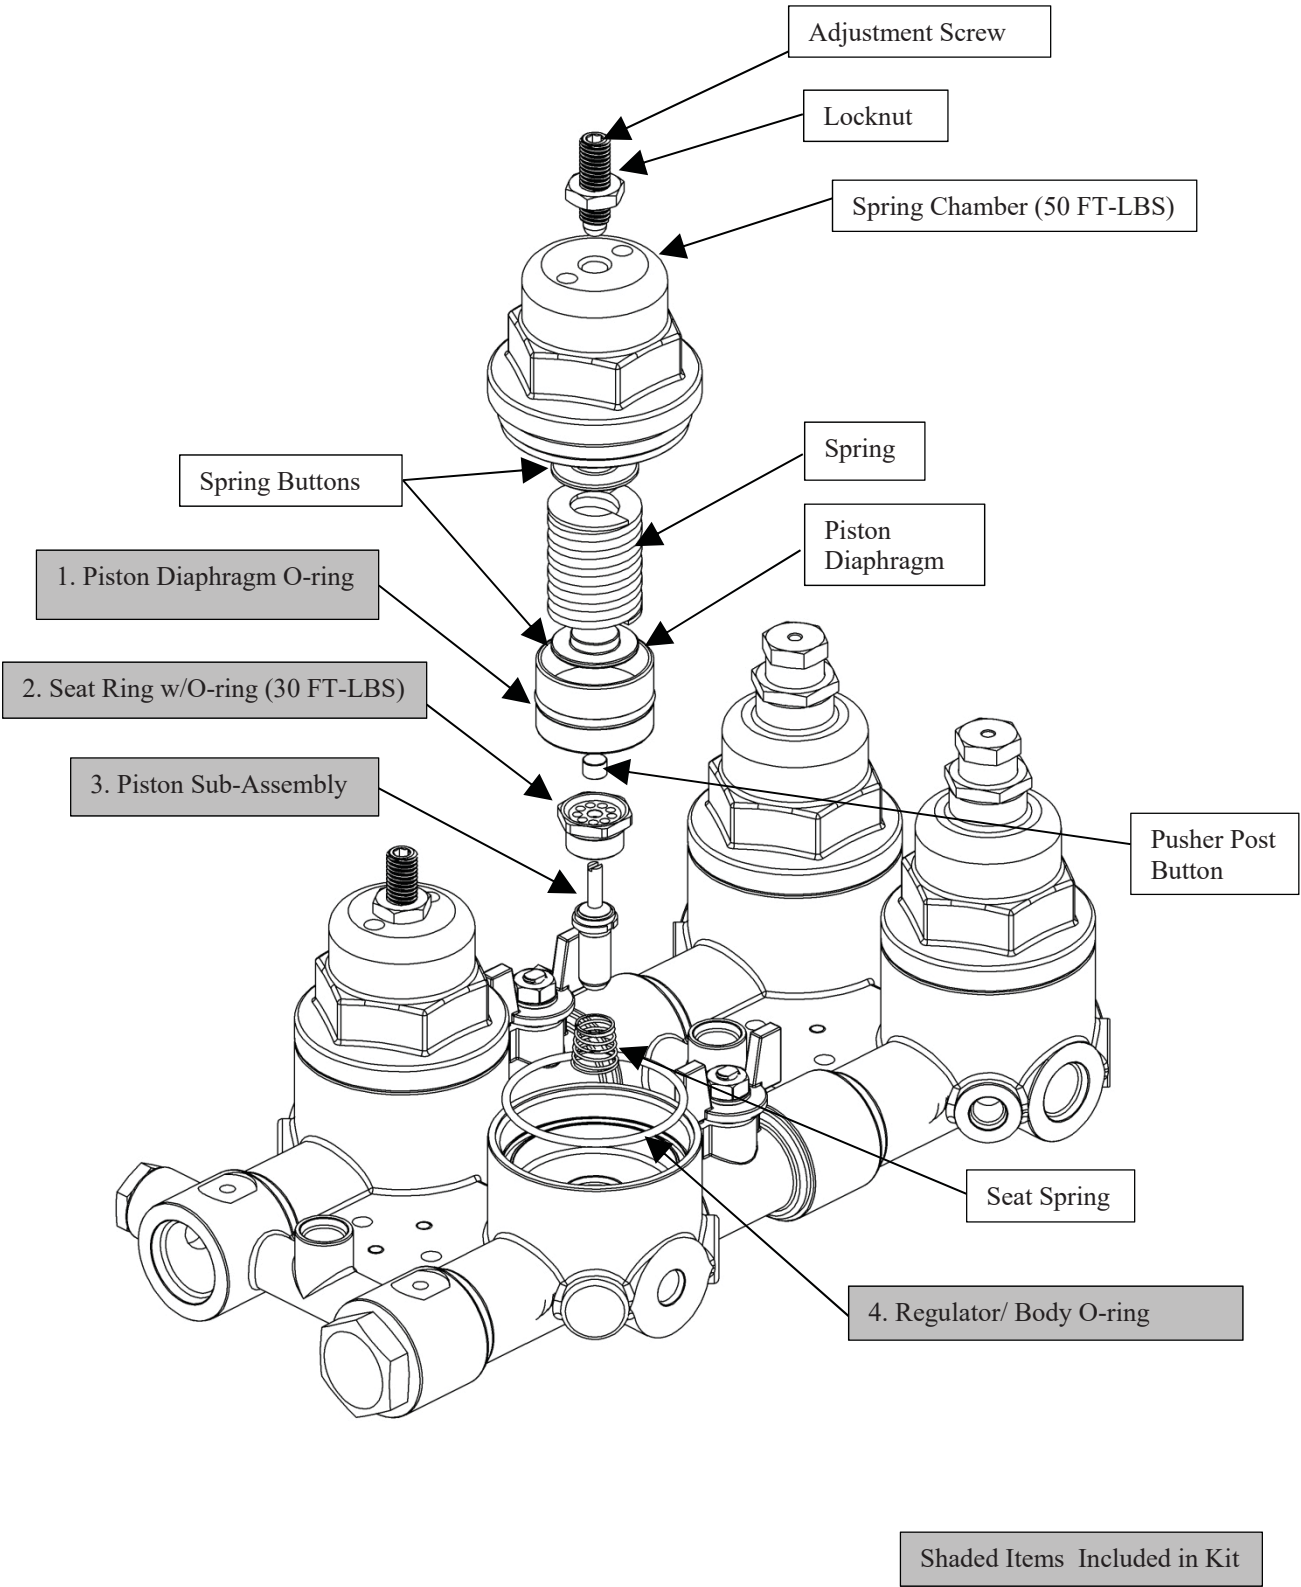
NFPA/ISO version HP x HP Manifold Shown.
